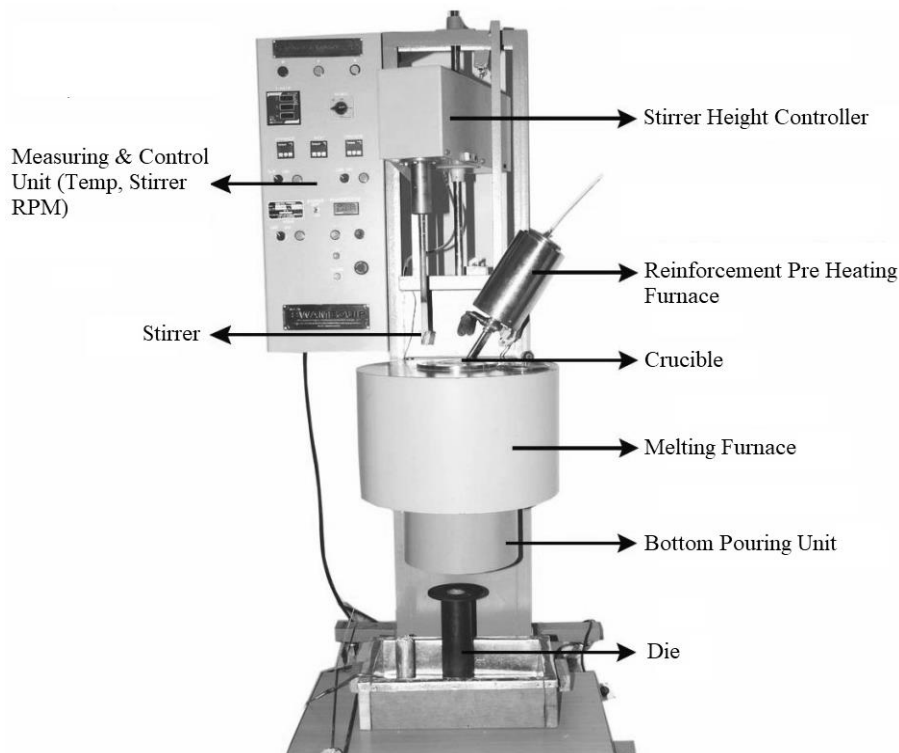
Bottom Pouring Type Stir Casting Furnace.
